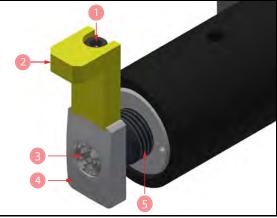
STANDARD ID CHUCK LEG COMPONENTS
